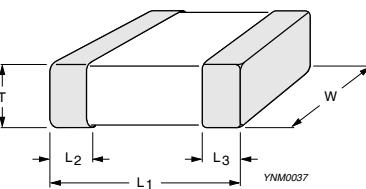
Surface mounted multilayer ceramic capacitor dimension
